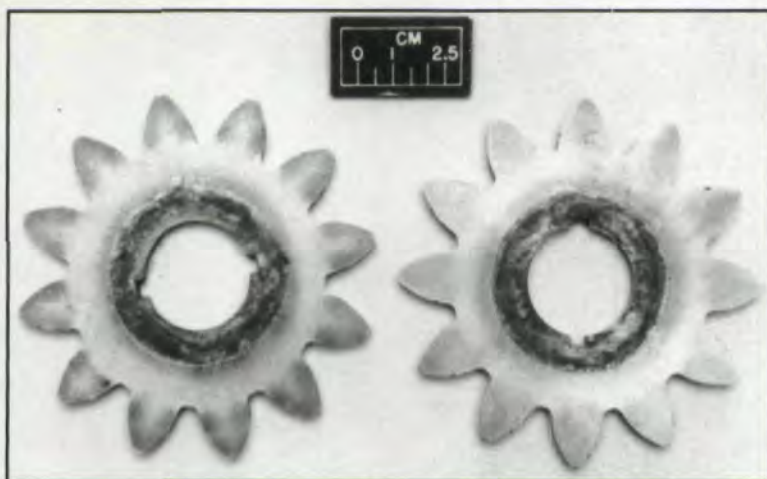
Test gear configurations. (a) Standard involute. (b) Noninvolute.
